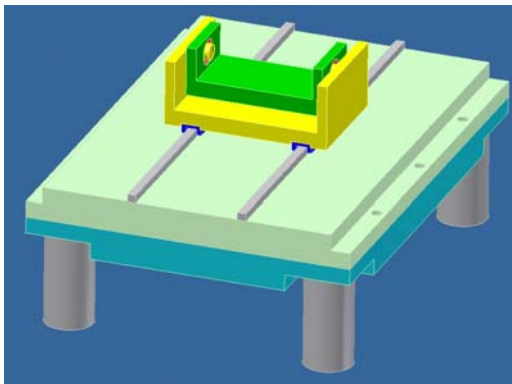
Simple Structure of Machine Tools with moving and fixed joints
